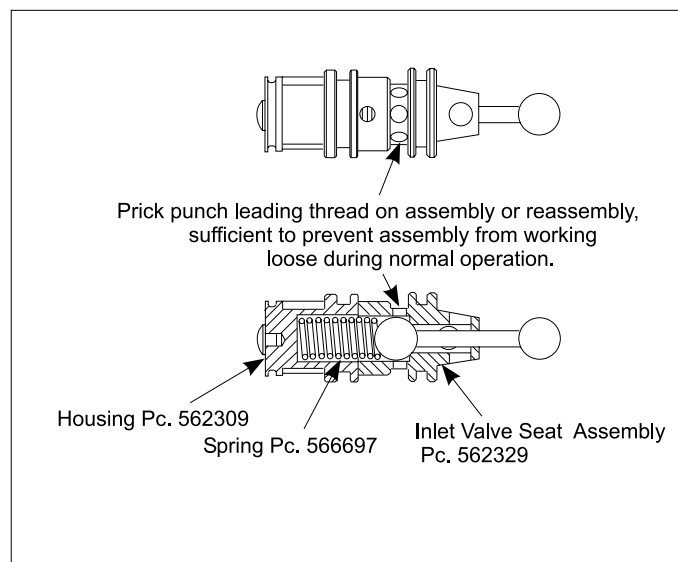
Inlet and Exhaust Valve Unit - ASSEMBLY
